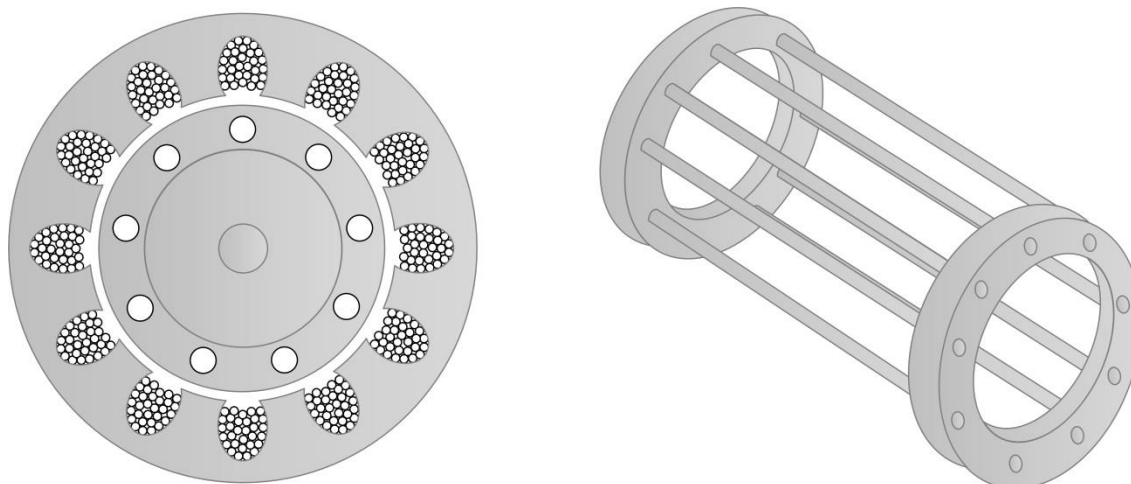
Representation of an IM: a) frontal view of the stator and squirrel cage rotor, and b) perspective of the squirrel cage.
